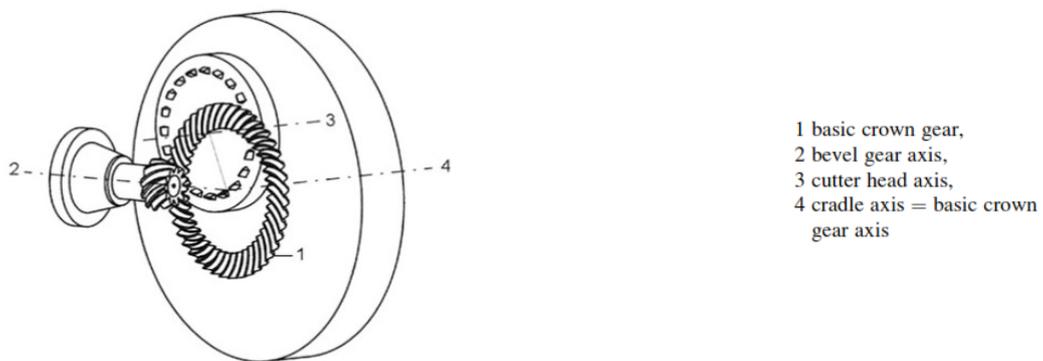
Virtual crown gear in a bevel gear generator [12]
